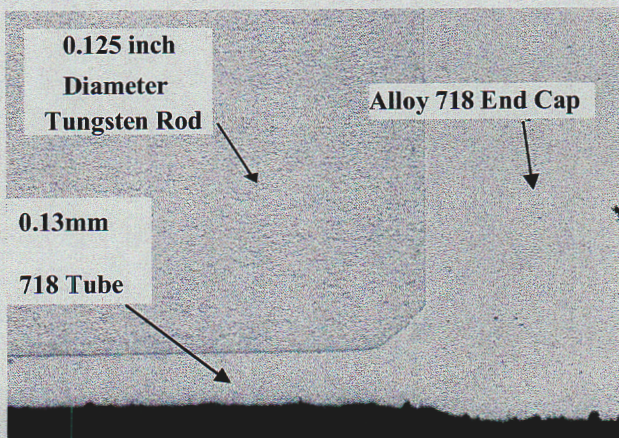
Powder Metallurgy Tungsten Rod Clad with Alloy 718-HIPed @ 1020°C for 1 Hour Note that the cladding has bonded to the end cap and conformed to the corner radius of the tungsten rod.
